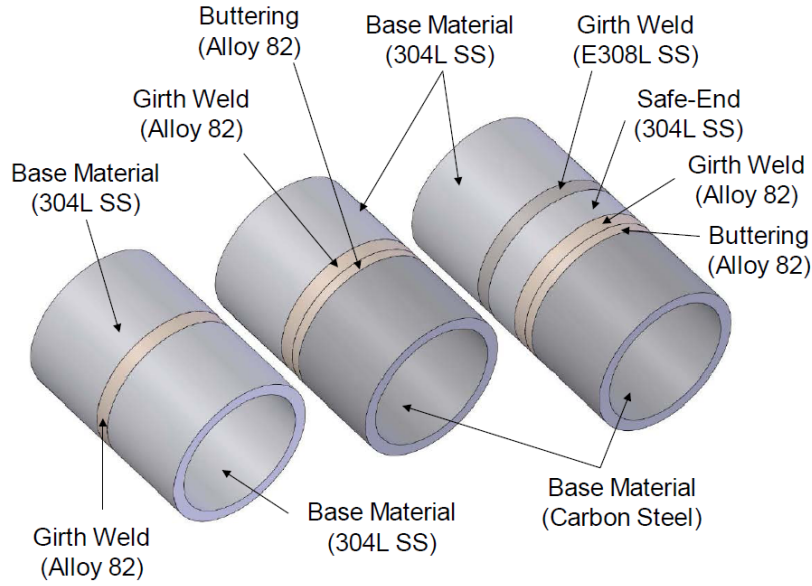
Three Specimen Types (Courtesy: EPRI)
